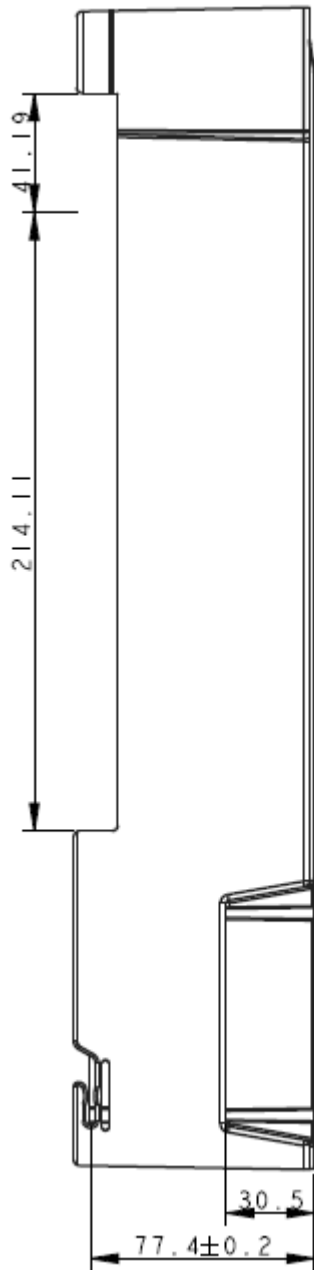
MiTAC E8020 Capri Dimension (Side View Detail 1)
